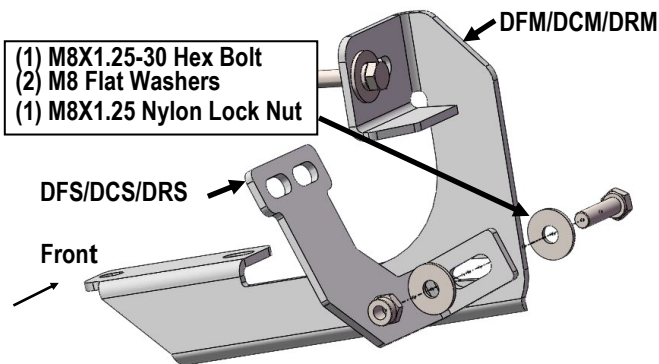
Driver Front Mounting Bracket installed for models w/ factory threaded inserts (M8 Bolt/Nut Plate not required)
